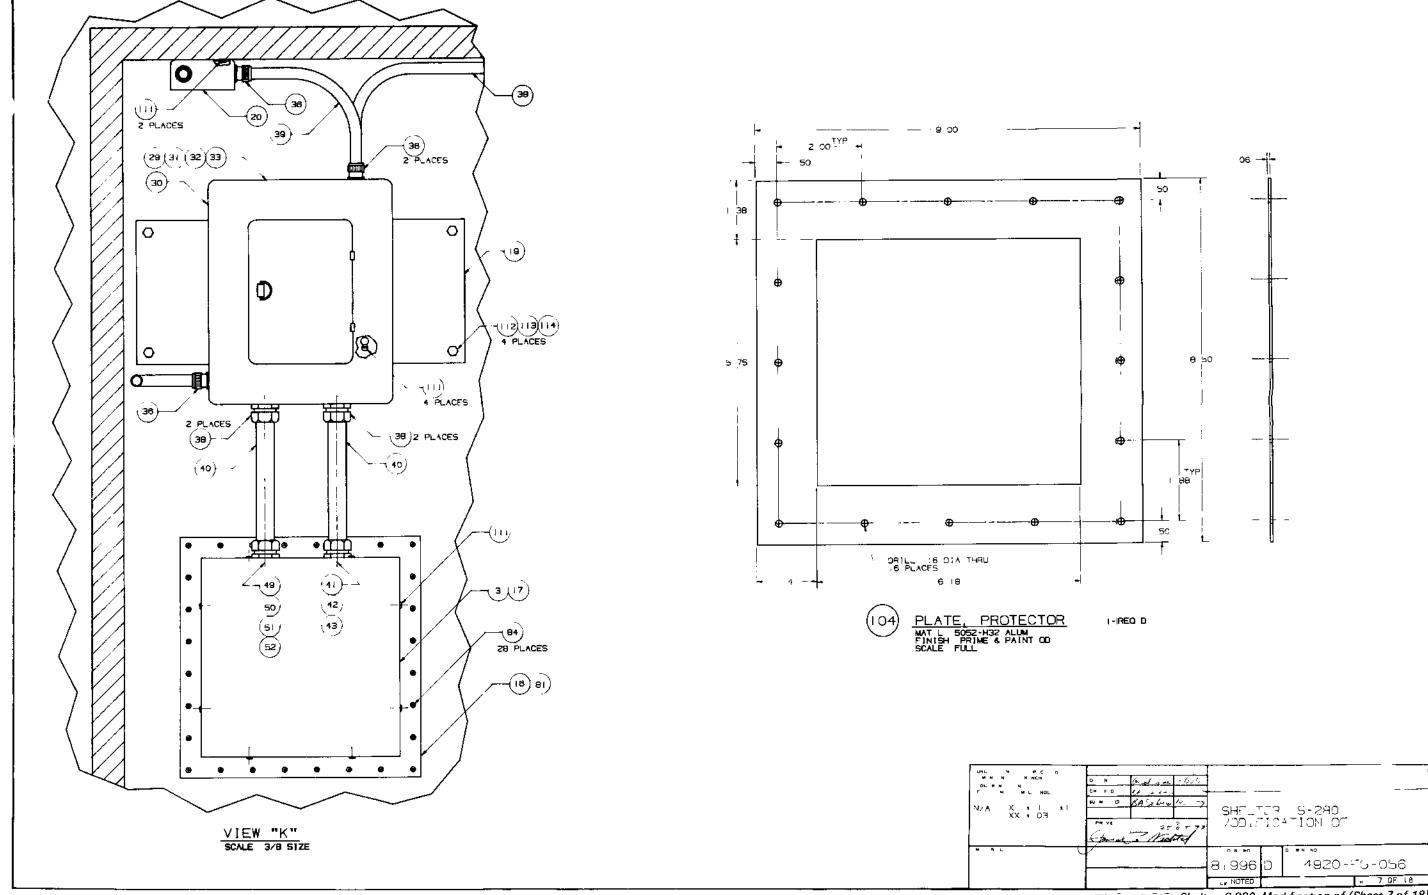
Shelter S 280, Modification of (Sheet 7 of 18) D-31/(D-32 blank)
